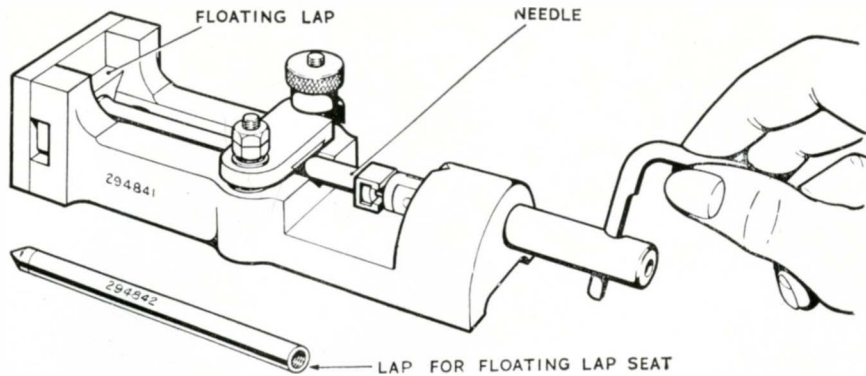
INJECTOR NEEDLE LAPPING JIG
